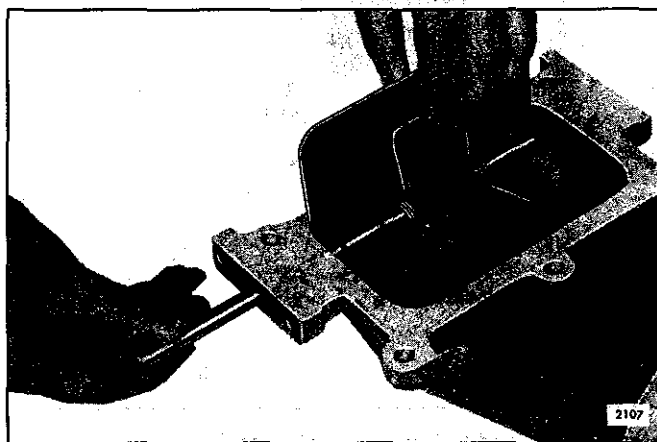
Installing Air Shut-Off Valve Spring and Valve
